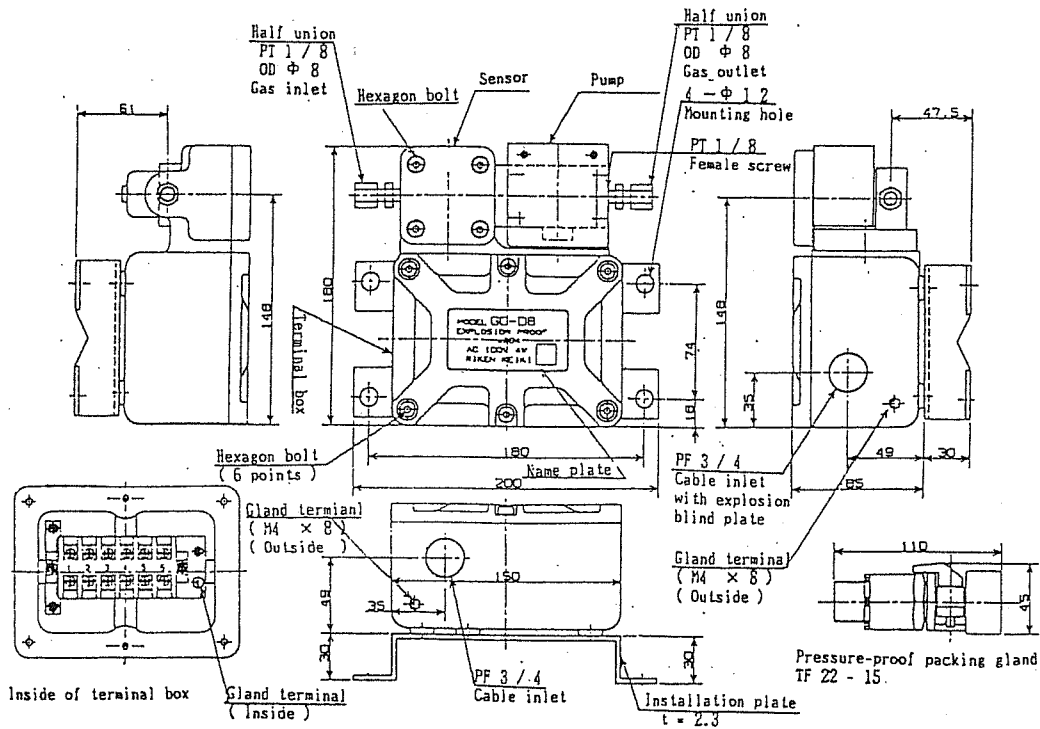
External drawing of sample drawing type detector head model GD-D8
